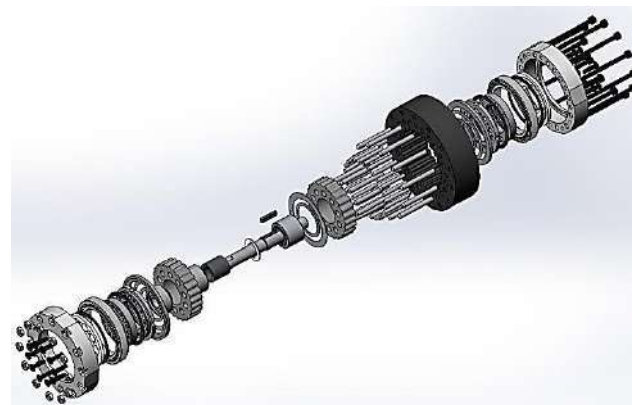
Exploded view of the high-efficiency very compact cycloidal reducer developed by authors
